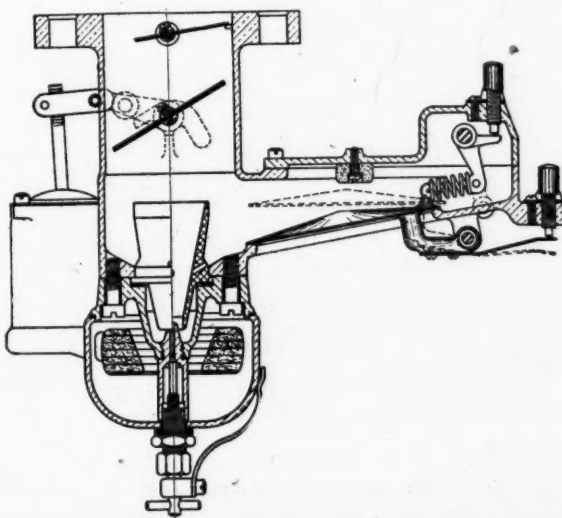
(below)—Vertical section of 2-in. carburetor used in the tests
